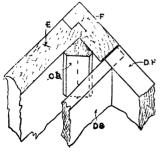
Front Corner Joint and Drawer of Combined Fitment.
